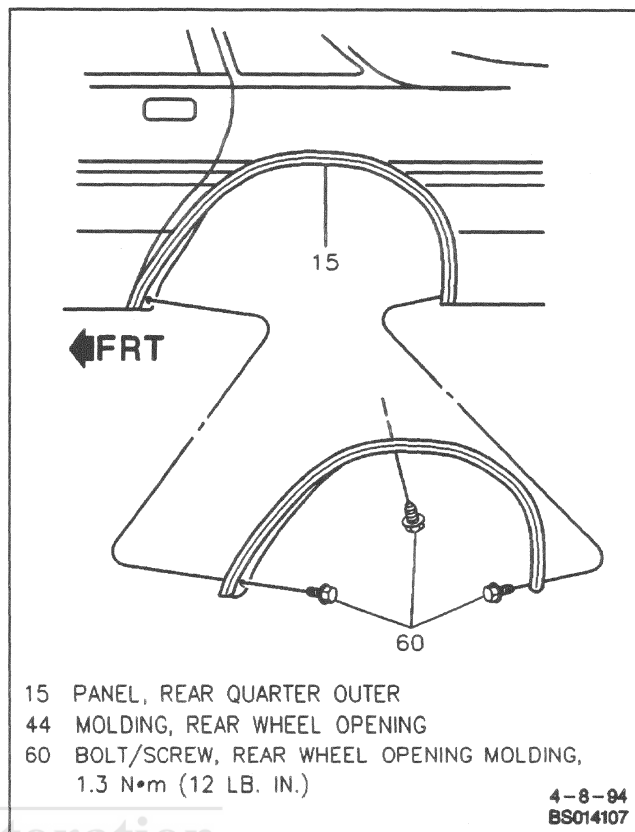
Rear Wheel Opening Molding -(Chevrolet Sedan Shown, Chevrolet Wagon Similar)
